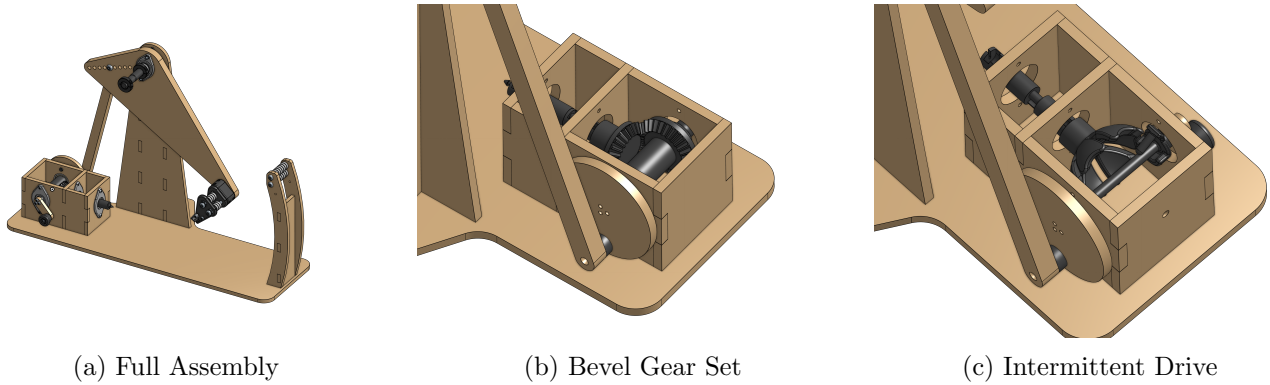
CAD models for the primary assembly and mechanical transmission components.
